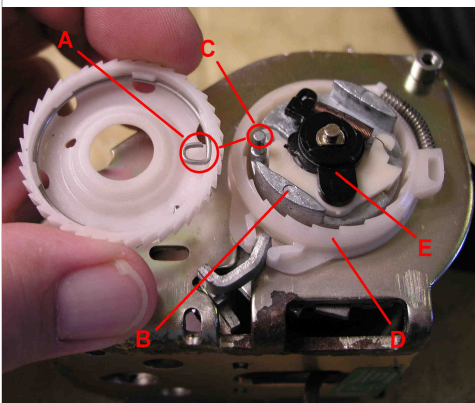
Outer toothed wheel removed and turned over. A) - The spring clip with loop. The outer toothed wheel is installed so the loop engages the post on the weighted flywheel, C. B) - The weighted inertia flywheel and locking mechanism. D) - The inner toothed wheel. When engaged by the locking lever, this wheel moves counter clockwise slightly and rotates the locking pawl to engage the belt reel. E) - The black
